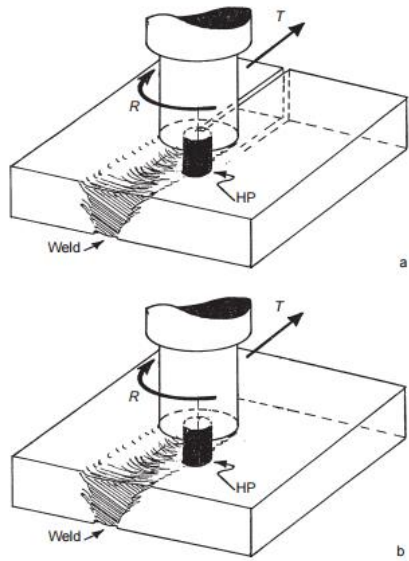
Schematic illustrations for FSW in thin plates. A rotating (rotational speed, R) pin (HP) penetrates into the sheet at a transverse speed, T: (a) butt weld arrangement; (b) weld zone development by advancing the head pin into a continuous plate section [23]
